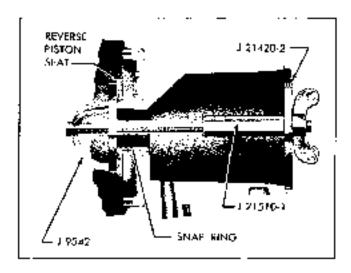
Compressing Reverse Piston Peturn Springs.
